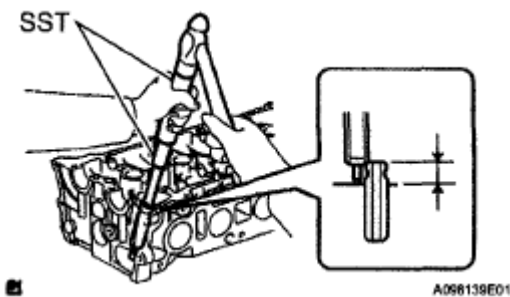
Taping Guide Bush To Specified Protrusion Height
